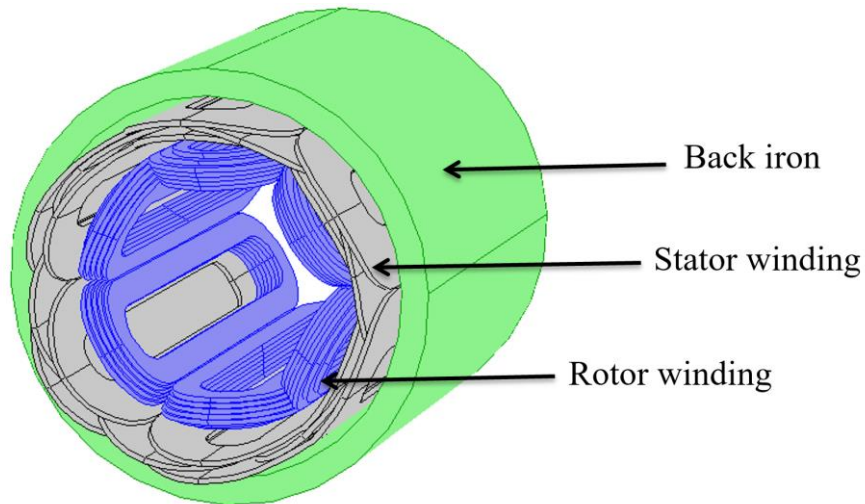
9. An example of a fully superconducting machine configuration [51]
